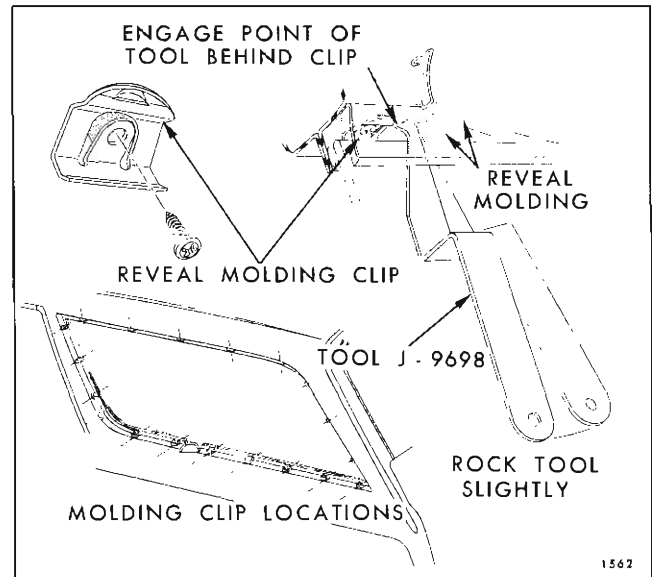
E36—Rear Quarter Window Reveal Molding Removal
